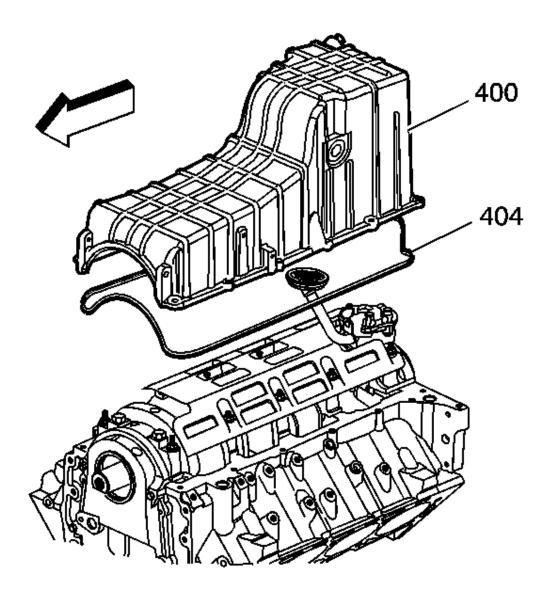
View Of Oil Pan & Gasket Courtesy of GENERAL MOTORS CORP.
